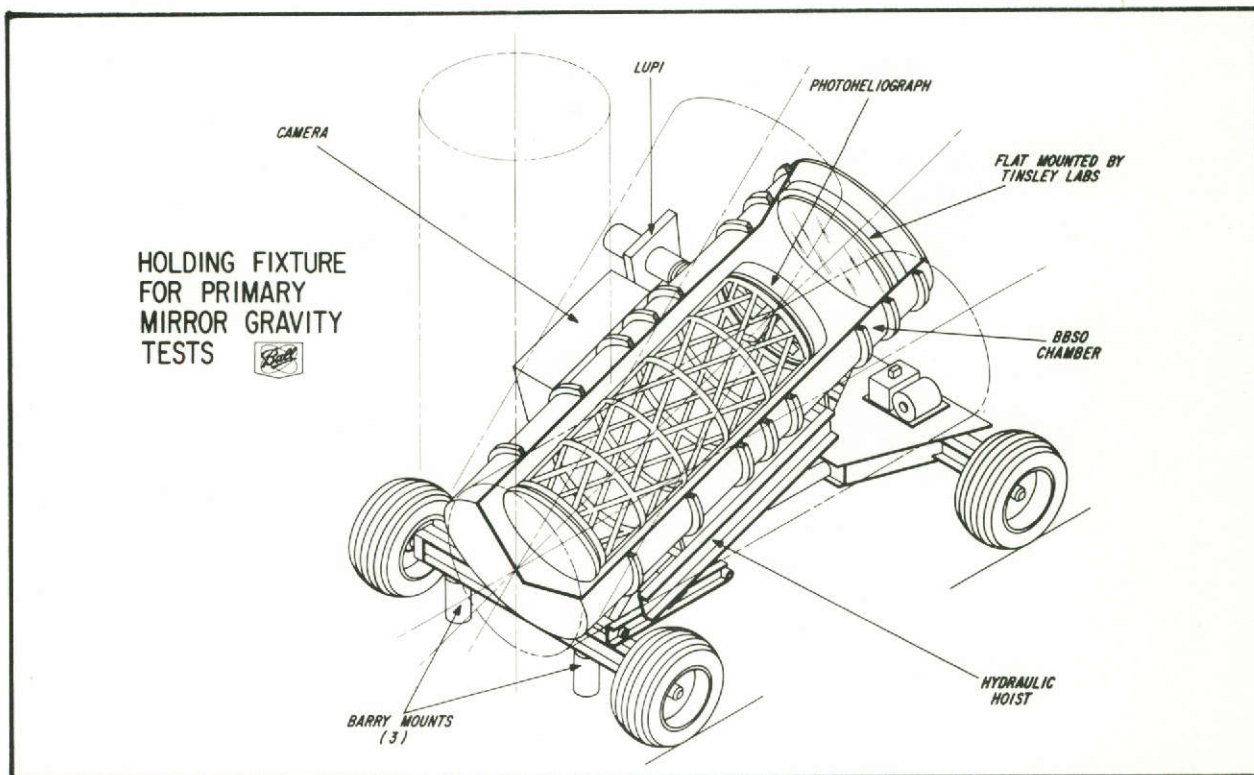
Holding Fixture for Primary Mirror Gravity Tests
